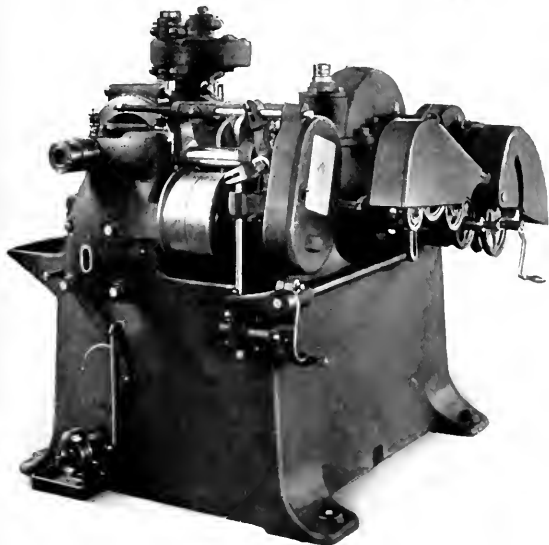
Opposite Side of Machine showing Single Pulley Drive
